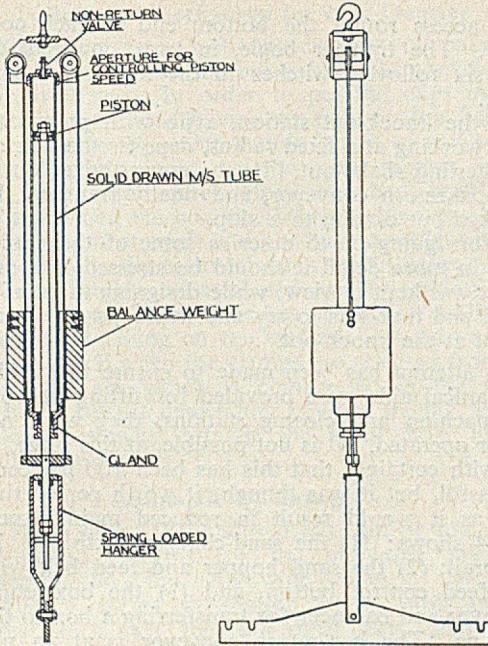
Balancer for Transferring Boxes from the Conveyor to the Machine.
